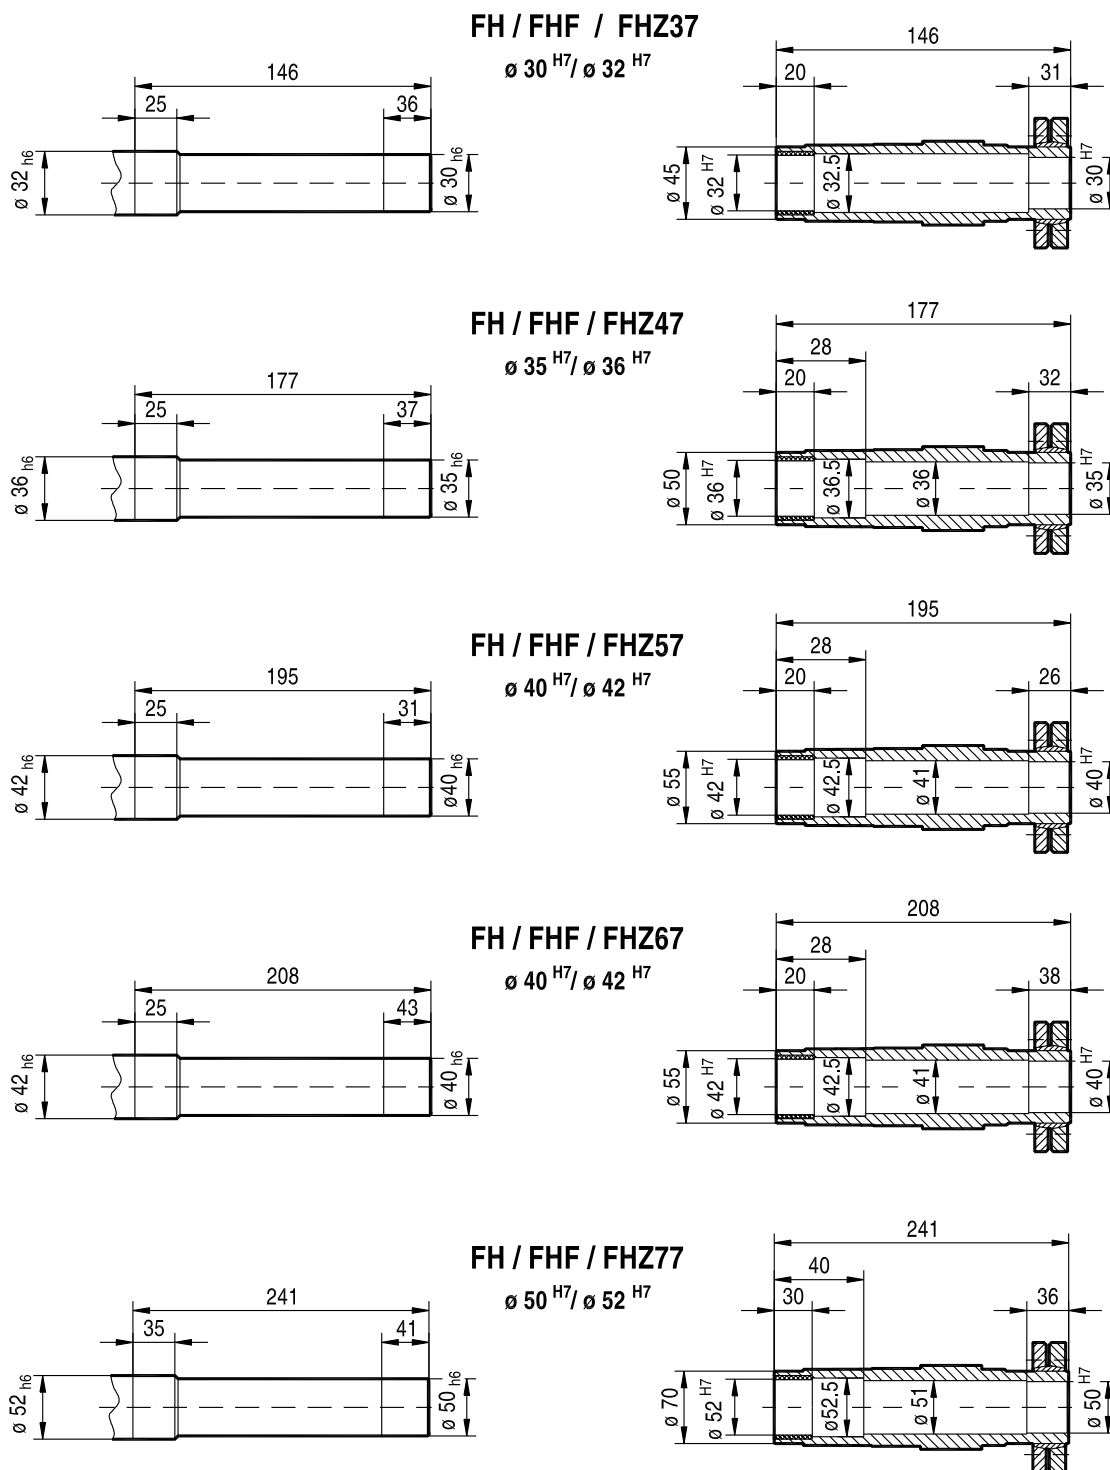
Shouldered hollow shaft FH/FHF/FHZ37...77
